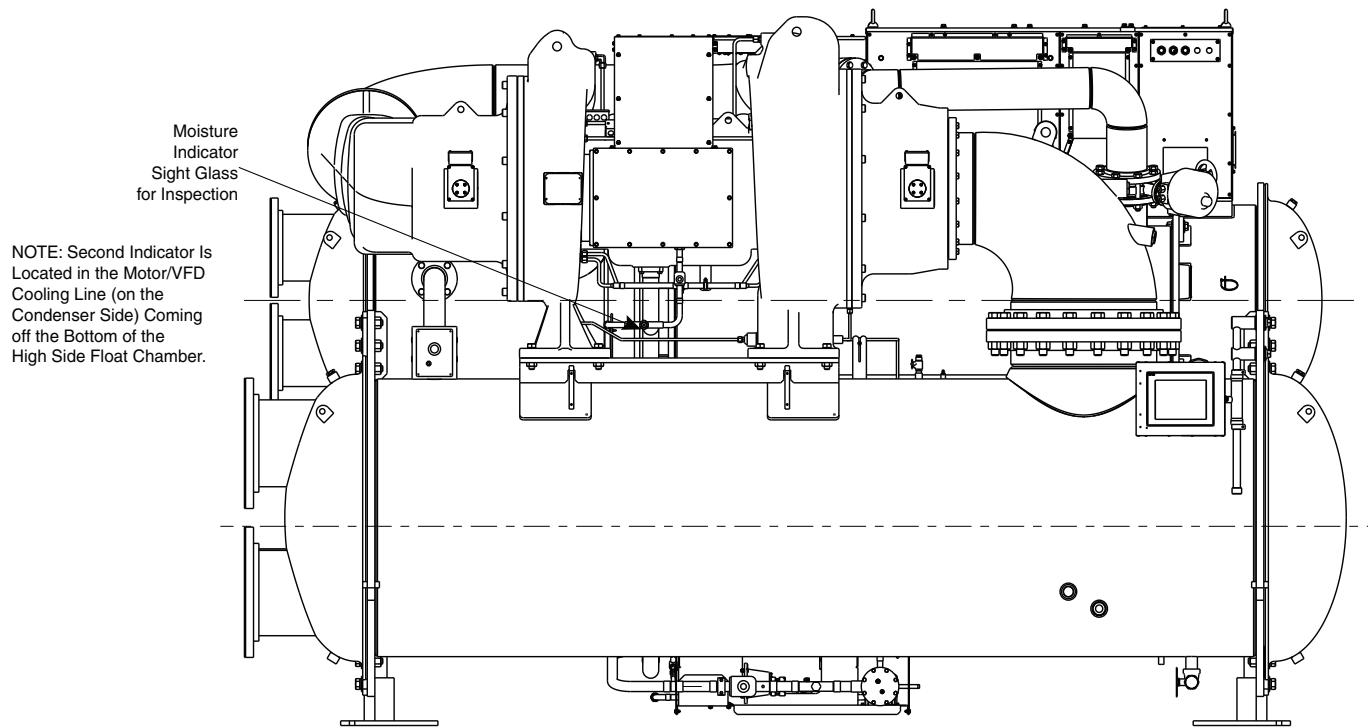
Moisture Indicator Sight Glass for Inspection
